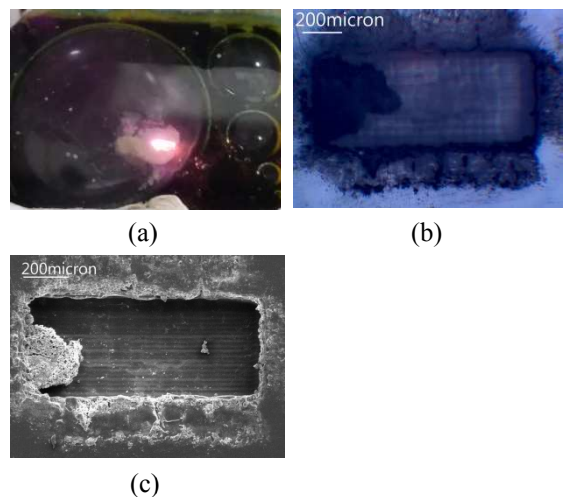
Advanced laser milling; (a) during machining, (b) machined result, (c) SEM picture
